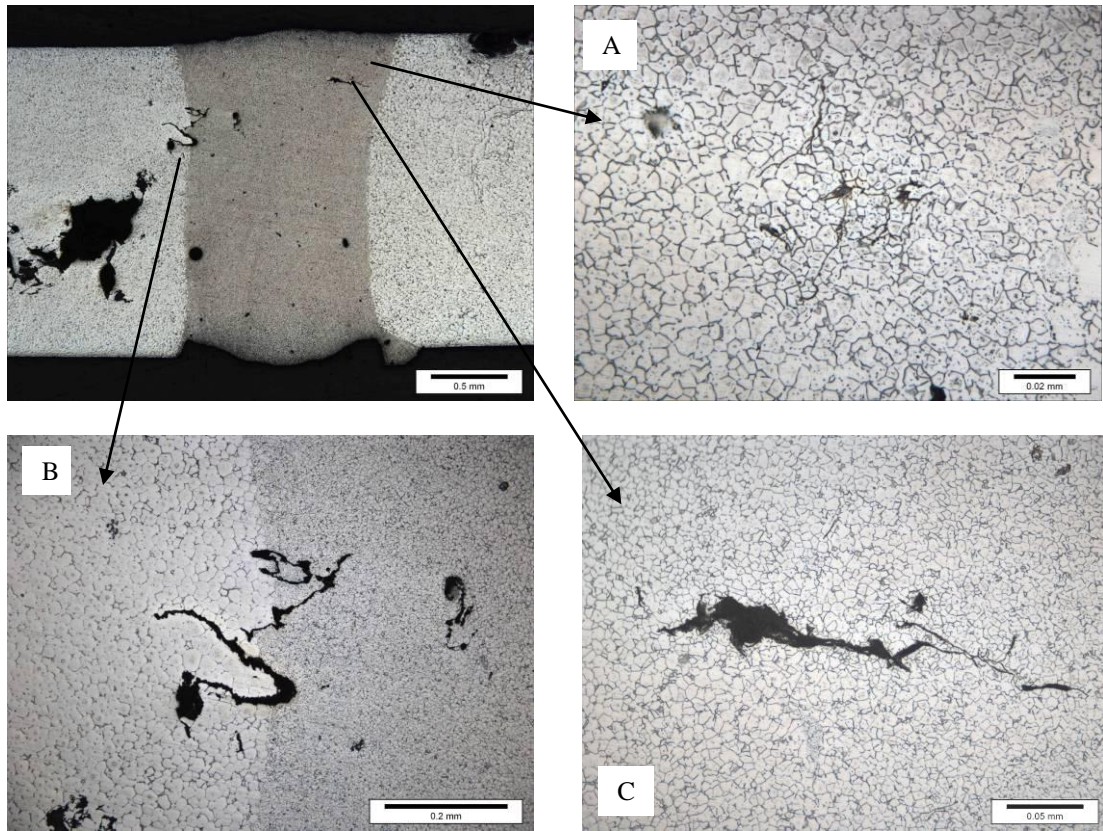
Solidification Cracks in the Sample Welded at 0.3 mm gap – End Section
